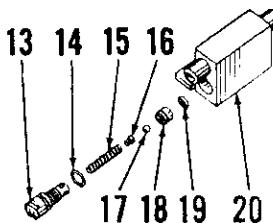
Exploded view of Series B-414, 354, 364 and 384 power steering relief valve assembly used with dual stage pump.
